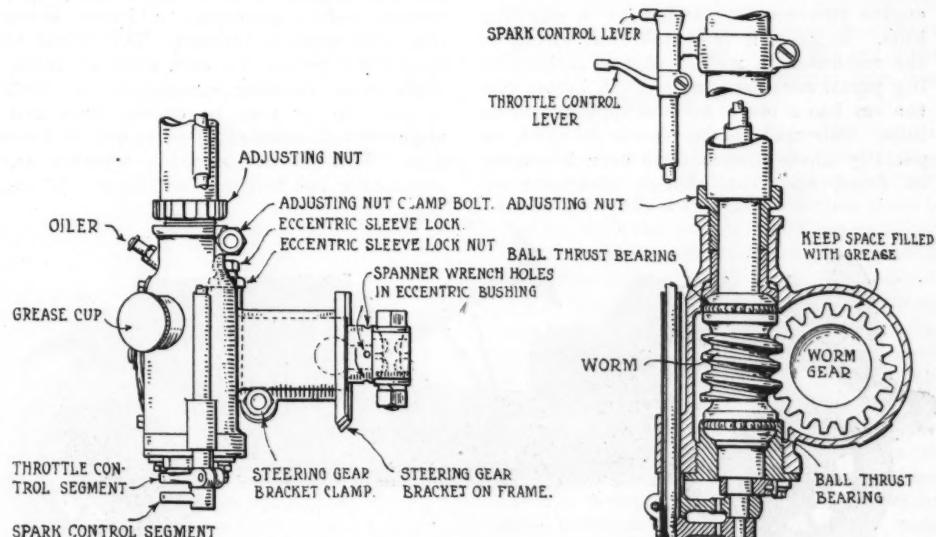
Exterior and interior views of steering gear, showing how play can be taken up. Adjust with wheels locked to one side as far as possible
